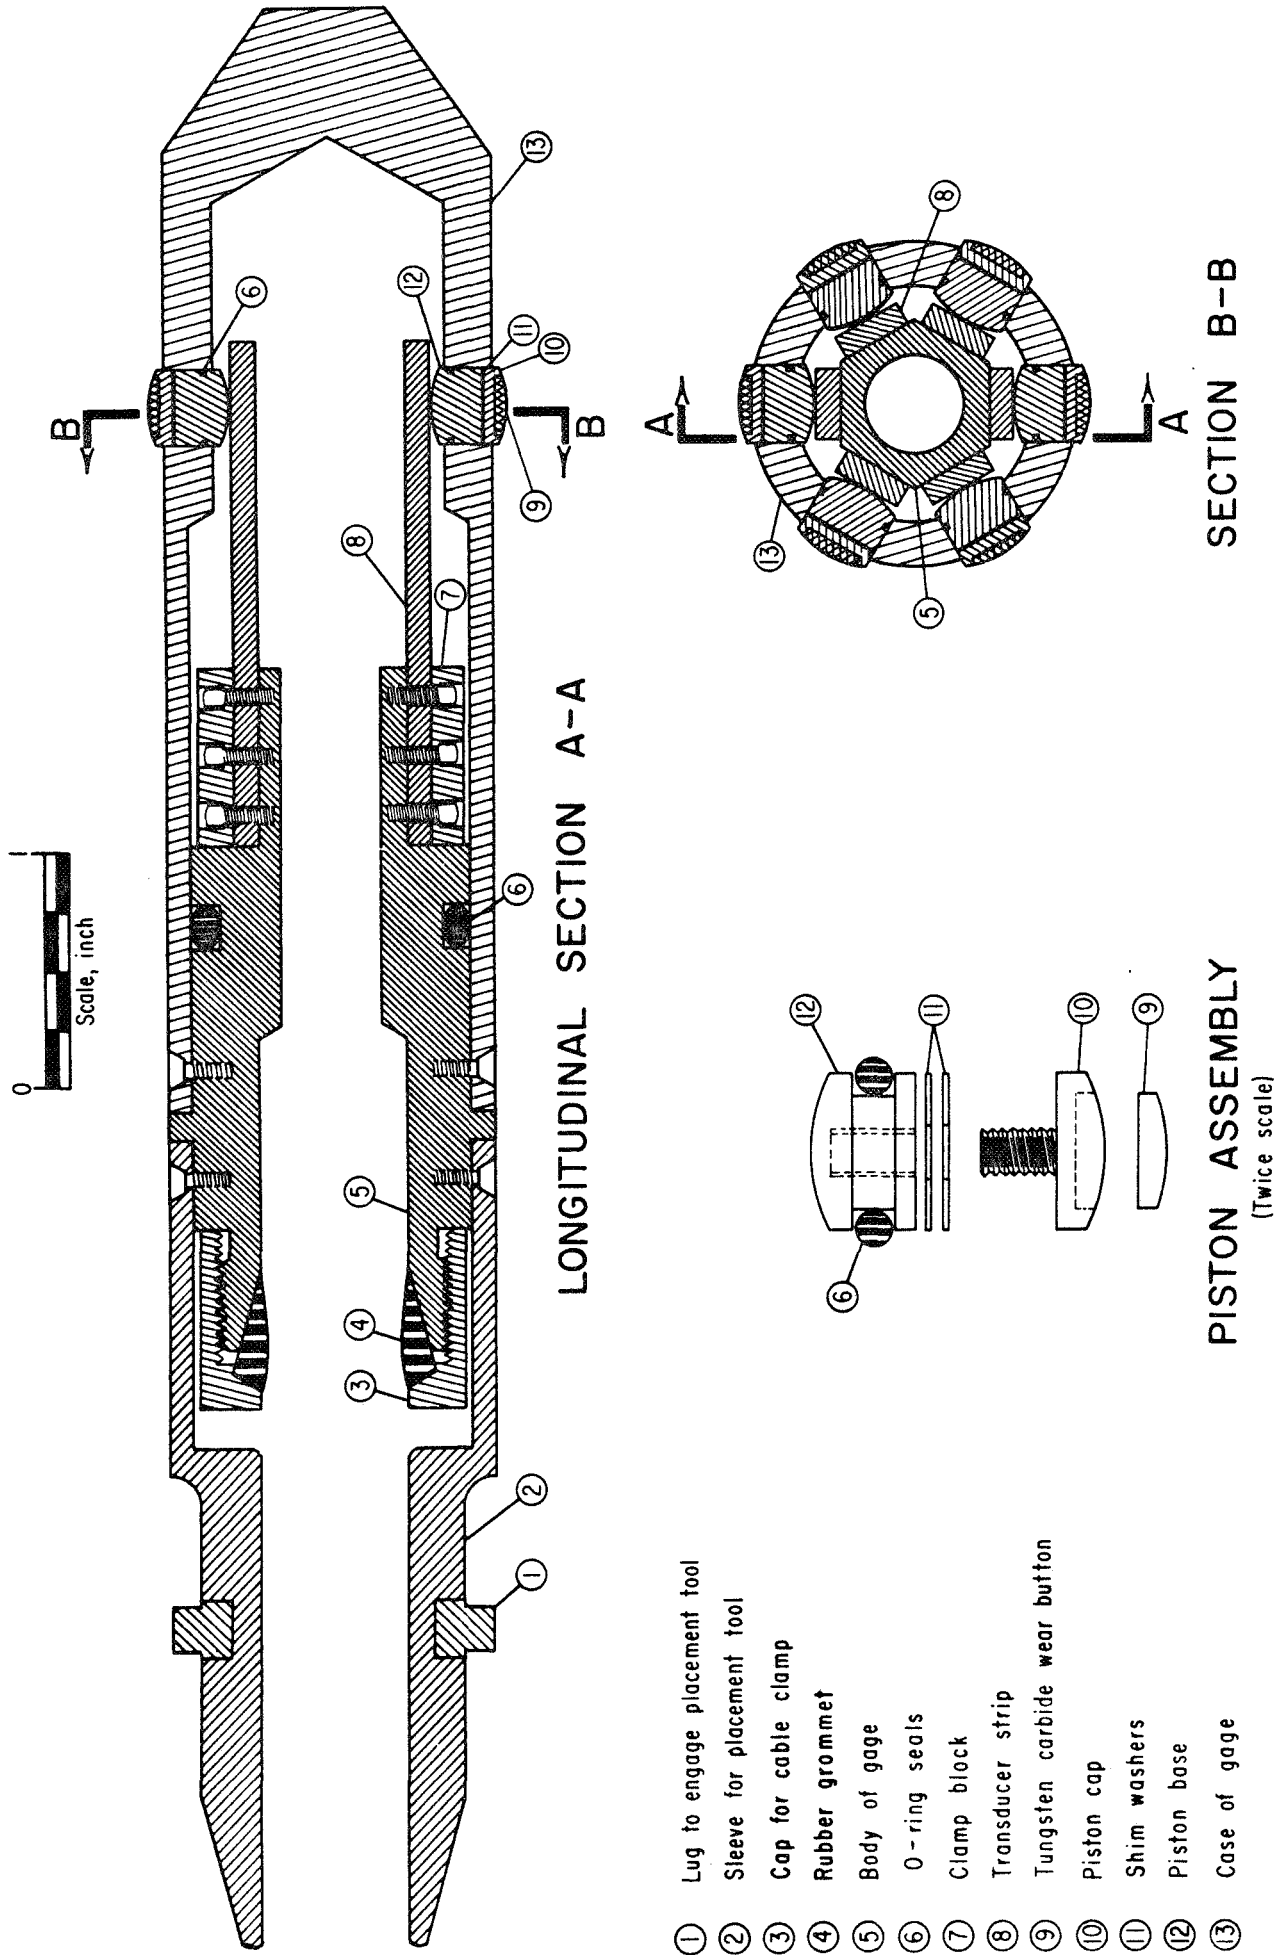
Drawing of Principal Parts of the 3-Component Stress Gage Designed by the U. S. Bureau of Mines (after Merril, 1967 R. I. 7015)
